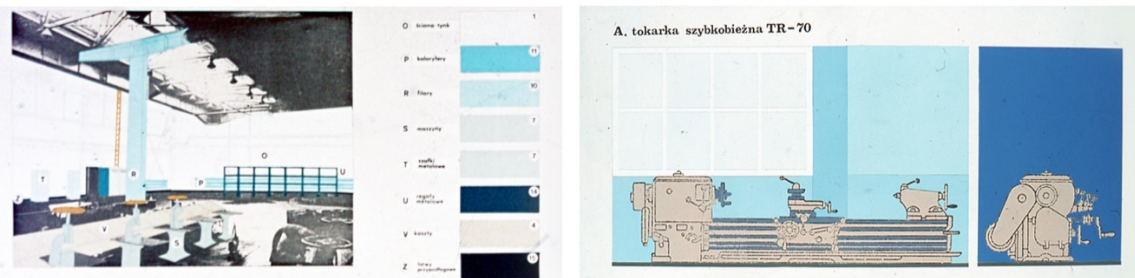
Color design of the workplace at the lathe and milling machine.
